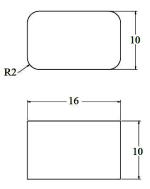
Technical Drawing of the Lower Coining Die Key
